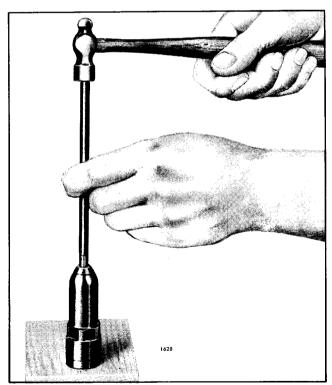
Removing Spray Tip from Injector Nut using Tool J 1291-02
